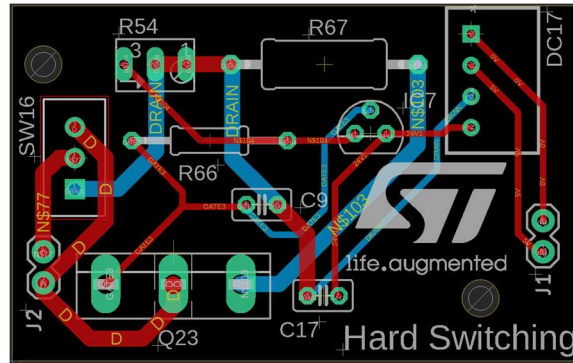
Picture of the Hard-Switching Board designed with Eagle PCB design
